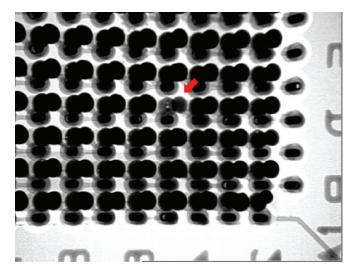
X-radiograph of CGA mounted on PCB showing missing column: Reject
